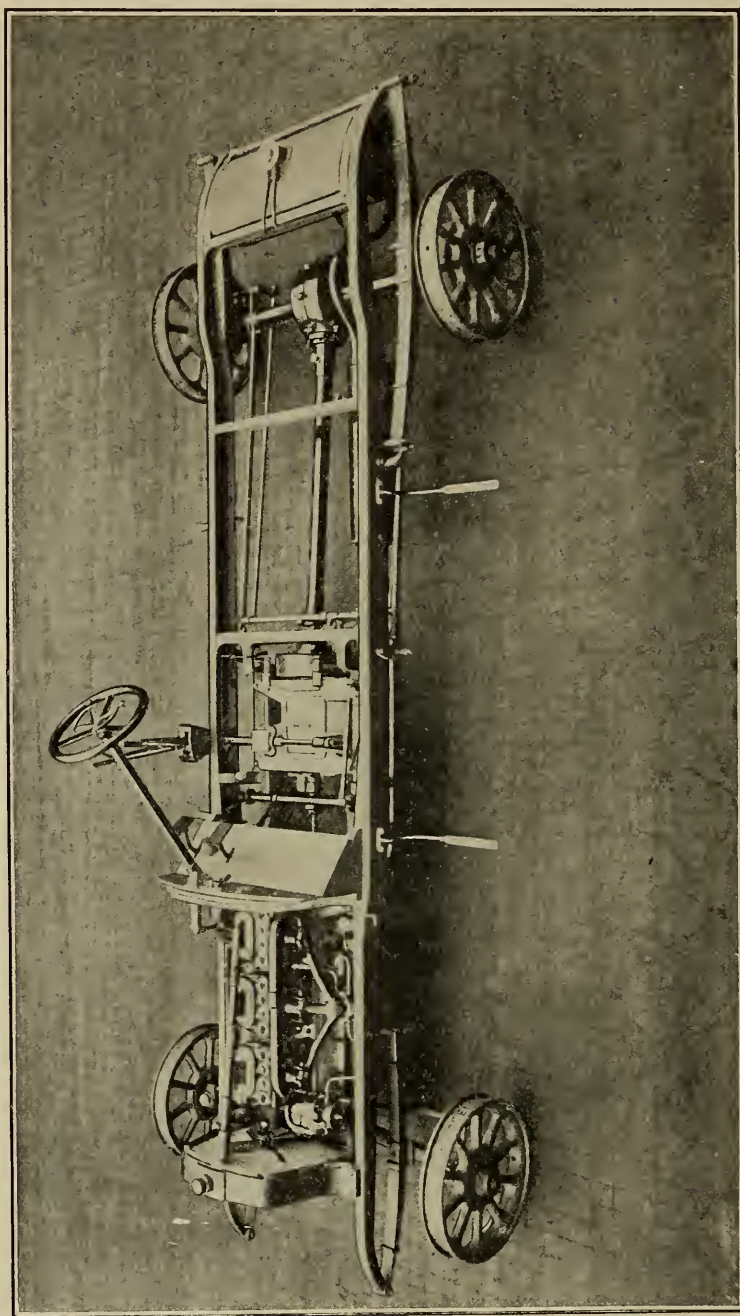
Chassis of 20 H.P. Six-Cylinder Talbot Car.
